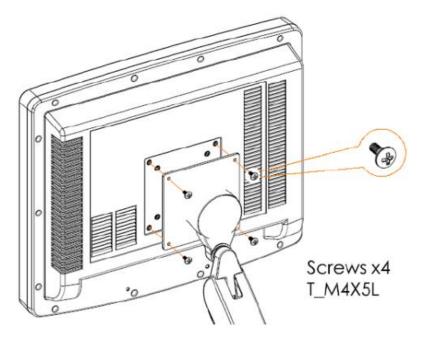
ARCHMI-8XXA Series VESA Mounting
